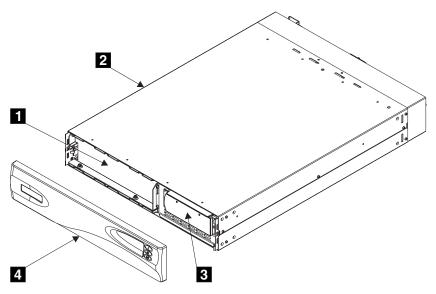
Exploded view of the 2145 uninterruptible power supply hardware
